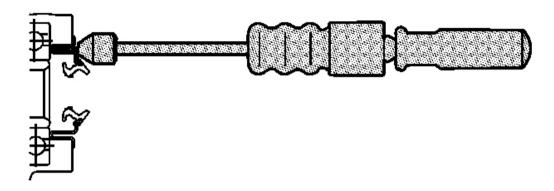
Axle Seal & SA9133T Courtesy of GENERAL MOTORS CORP.
